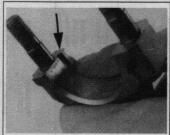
The notch on the side of the bearing cap matches the tang on the bearing insert
